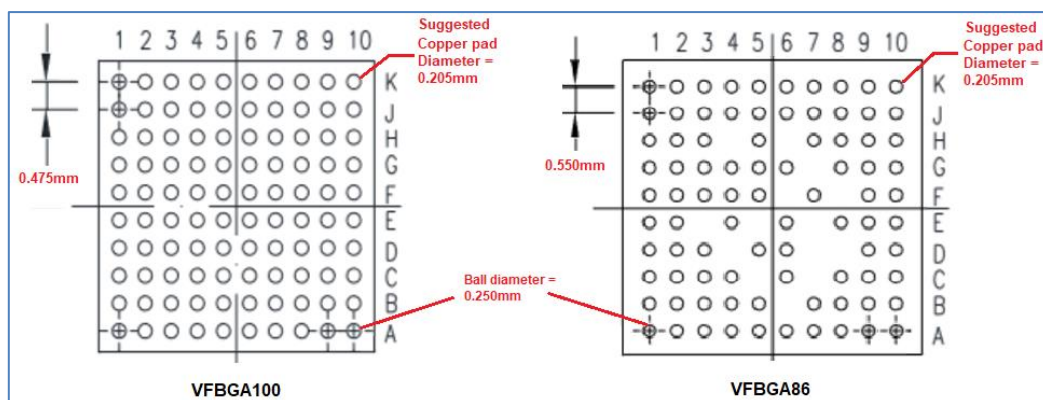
Bottom View of Packages VFBGA100 (Left) and VFBGA86 (Right)
